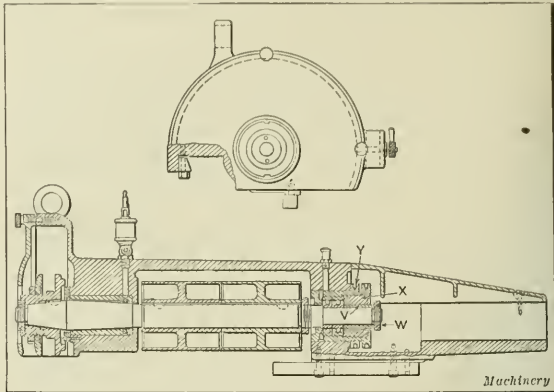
Sectional View through Wheel-slide, showing Improved Type of Spindle Bearing Construction
